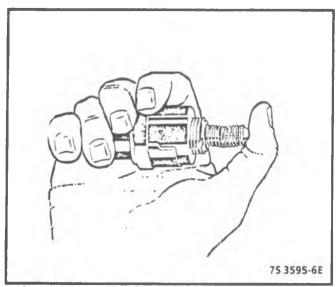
Adjusting Valve Pintle - Thread Type
